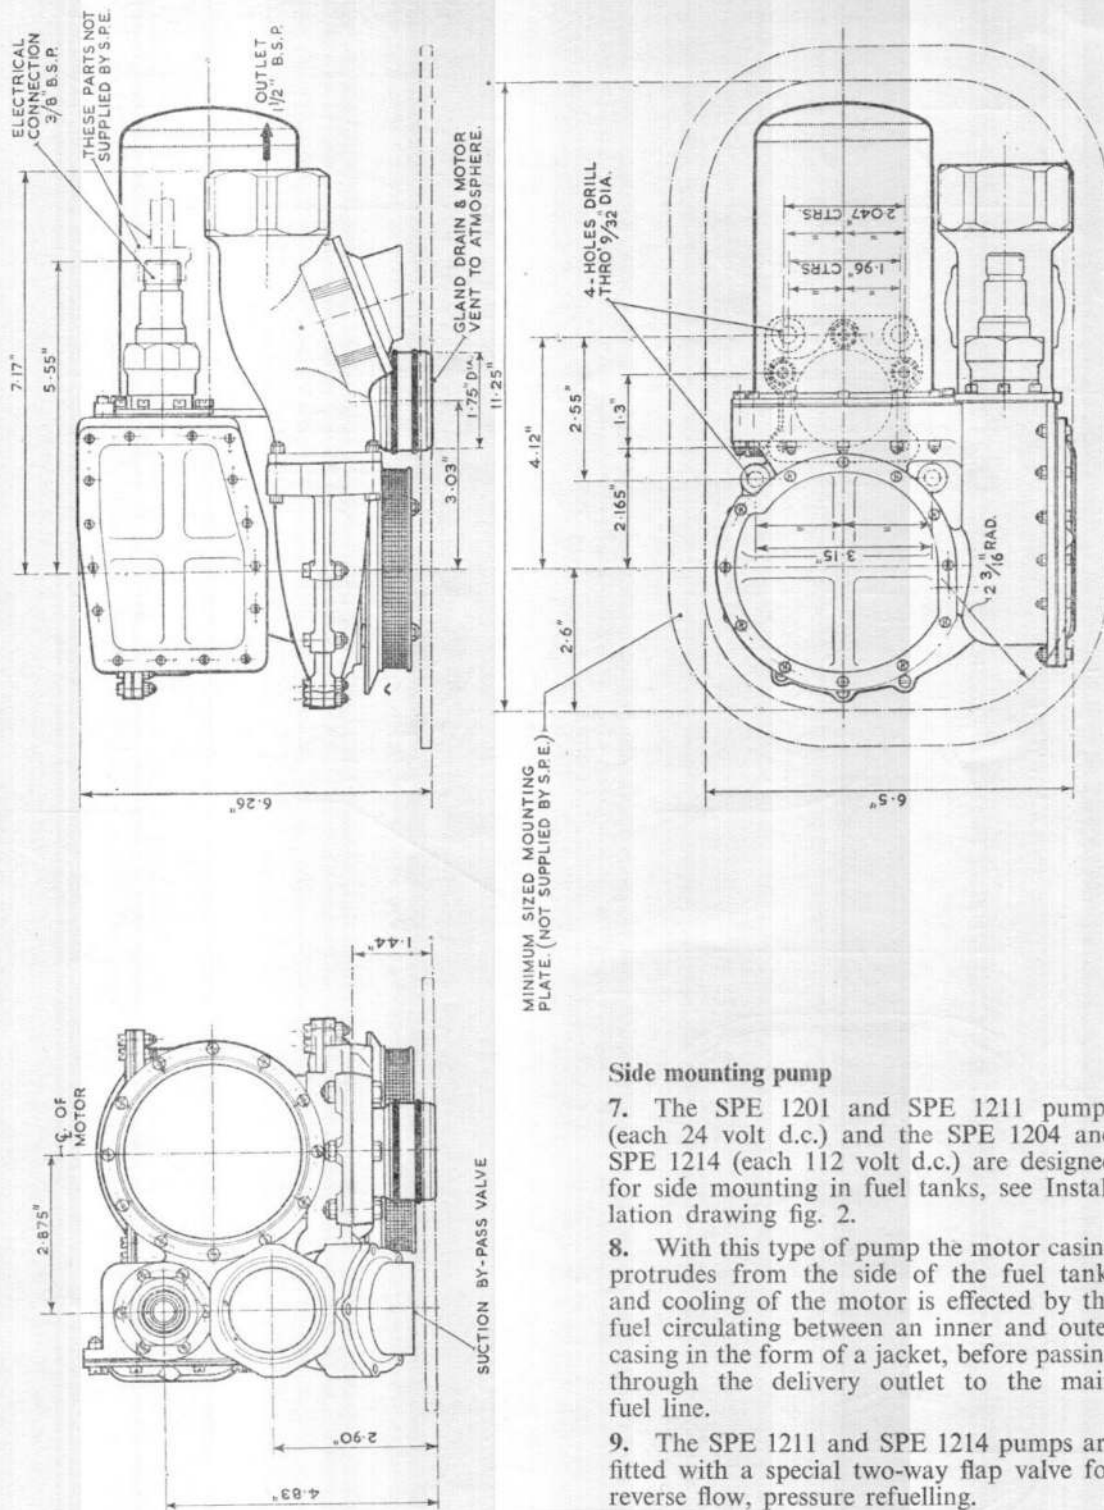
Installation drawing of fuel-tank pump mounting (side)
